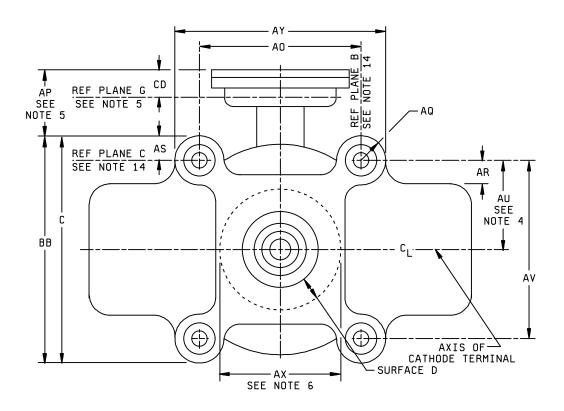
Outline drawing of electron tube type DOD-042 (bottom view).
